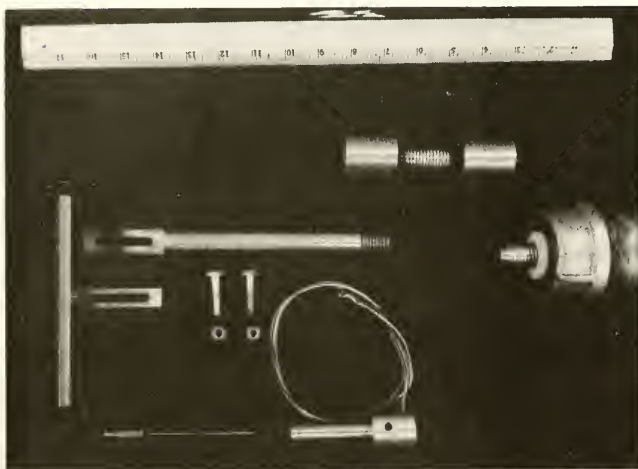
Pre-assembled view of beam support components. This configuration lacked lateral stability.
